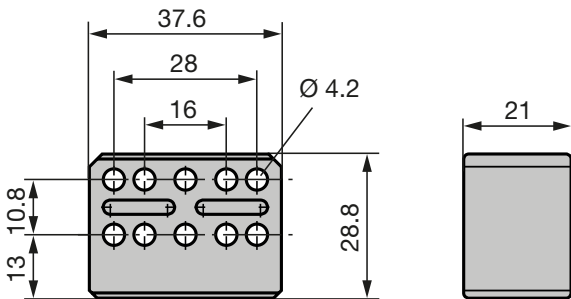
Installation dimensions of BTL6-A-3800-2 magnet
